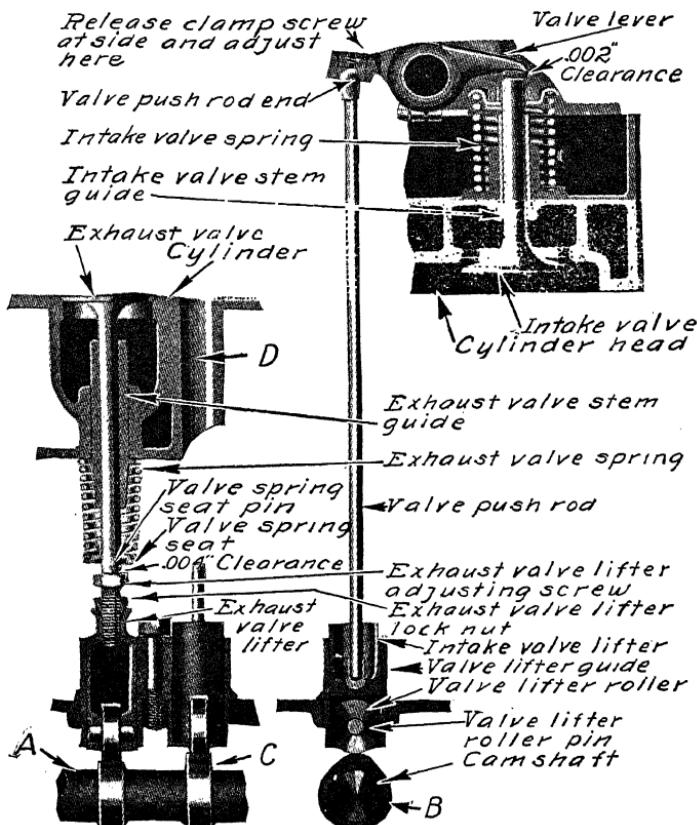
Typical Valve Operating Mechanism for an F-Head Engine
